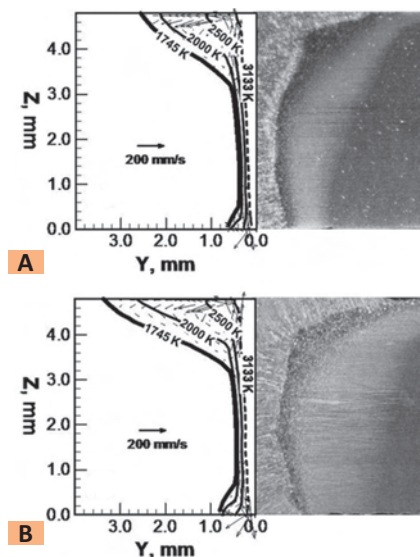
Comparison of experimental and simulated weld cross sections for the hybrid laser-GMA complete-joint-penetration welding of DH 36 steel for the following: A — Welding speed of 40.0 mm/s, laser arc separation distance of 1 mm; B — welding speed of 40.0 mm/s, laser arc separation distance of 5 mm.
